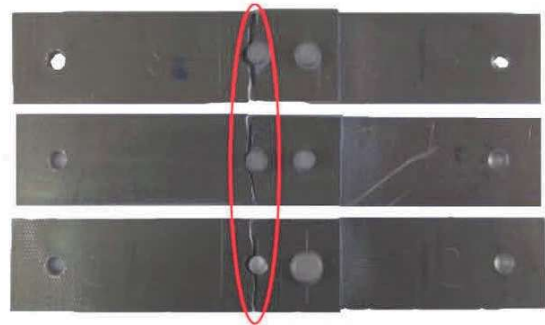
Fatigue destruction of riveted single-overlap samples [1]
